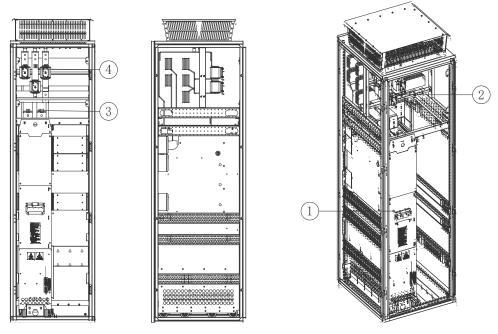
12-Pulse Frame Breaker Inlet Unit Structural Layout Table 2-8 12-Pulse Frame Breaker Inlet Unit Structural Layout Comments
